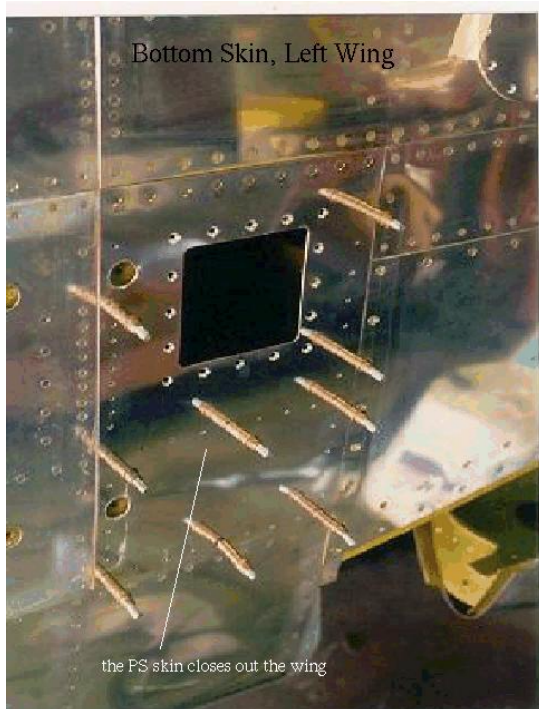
To get adequate access through the pylon access panel it's essential to rivet the doubler to the cover plate, not the skin. You will close out the wing through this opening.
